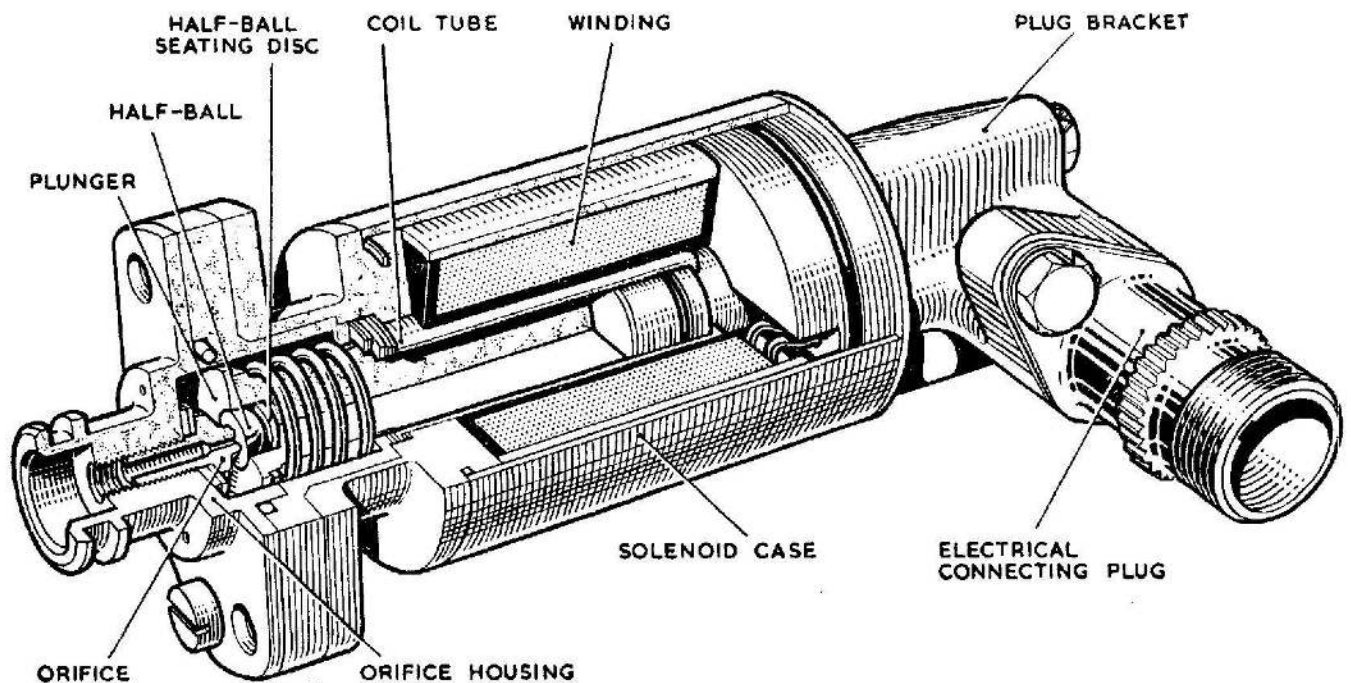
Solenoid valve, Type SOL 18—part sectional view
